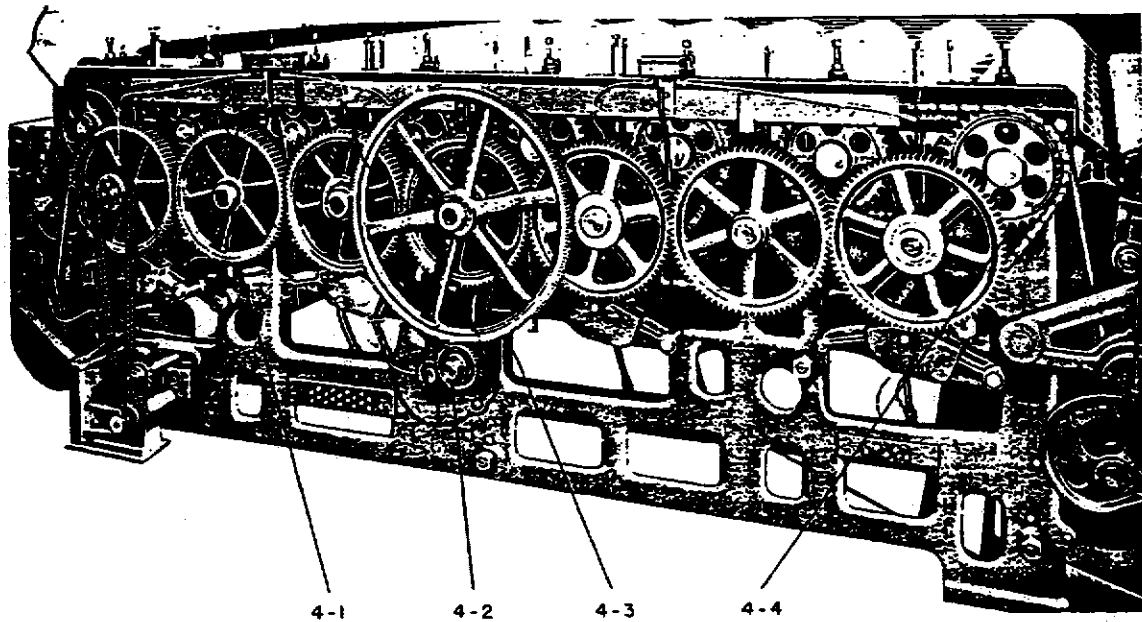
RIGHT HAND SIDE VIEW OF 8-ROLL FLATWORK IRONER
